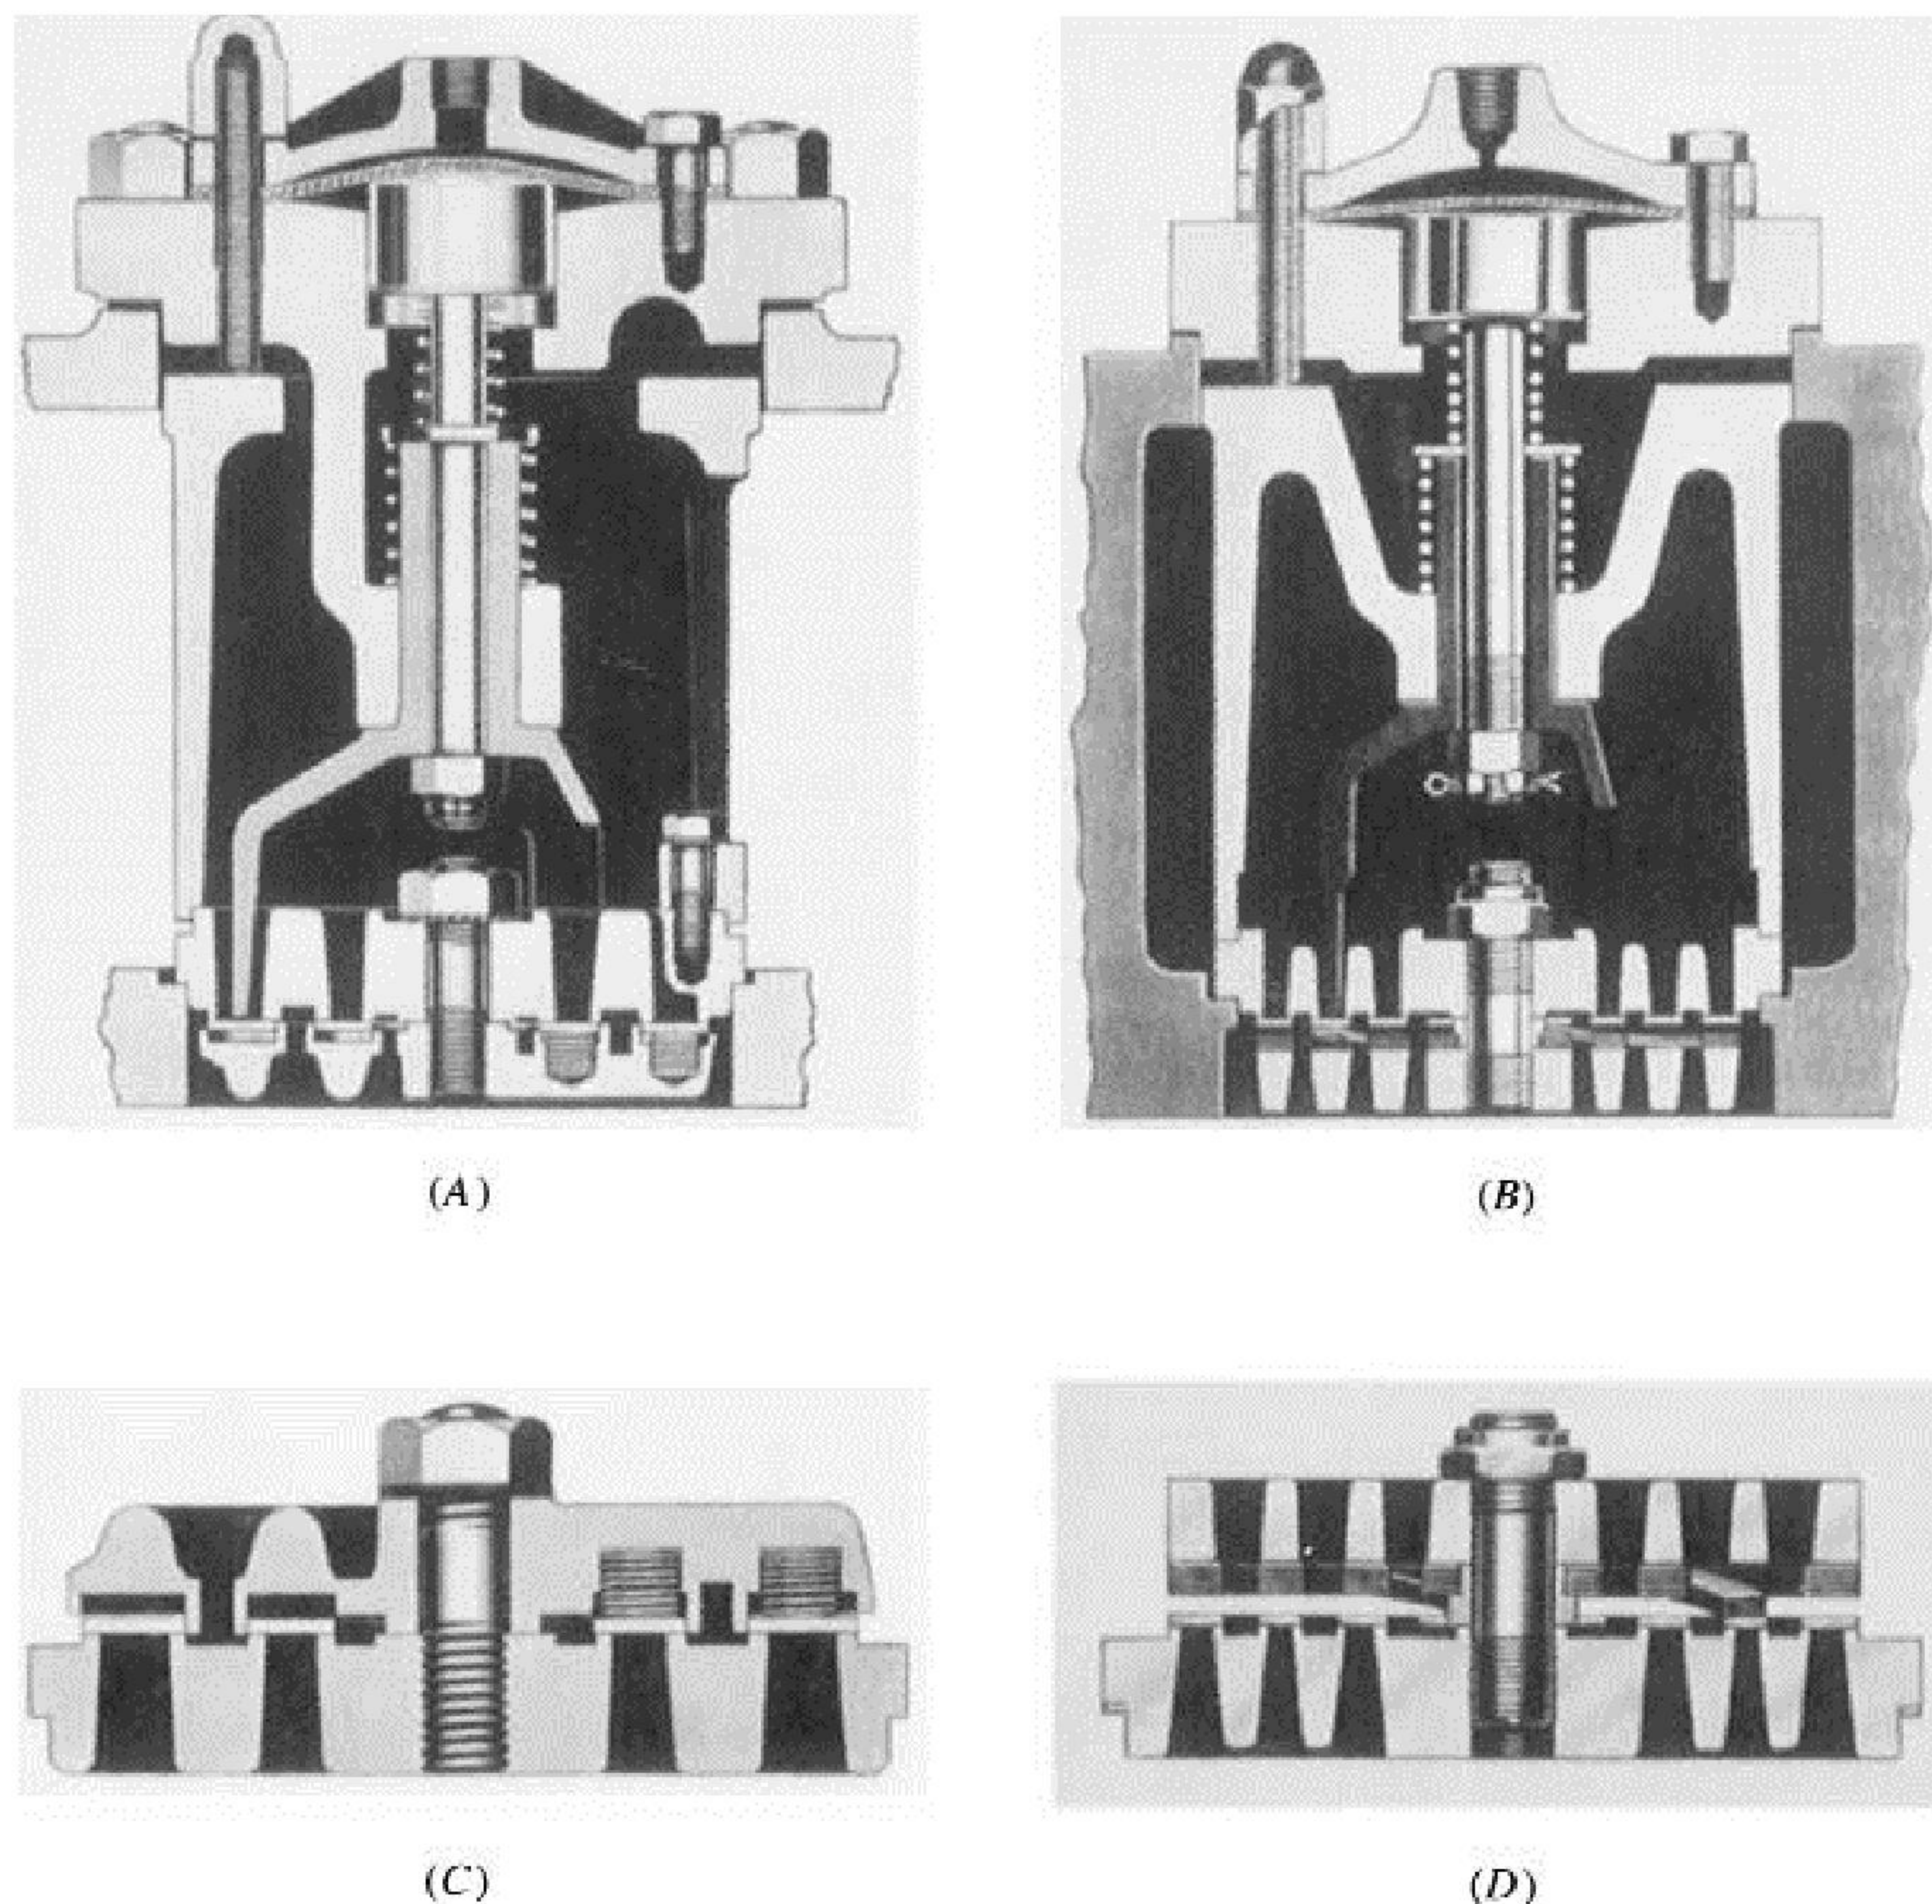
Compressor valves. *A* and *B*. Different designs of suction unloading valve assemblies. *C*. Compressor valve with individual disks and coil springs. *D*. Compressor valve with plate disk and finger springs.
